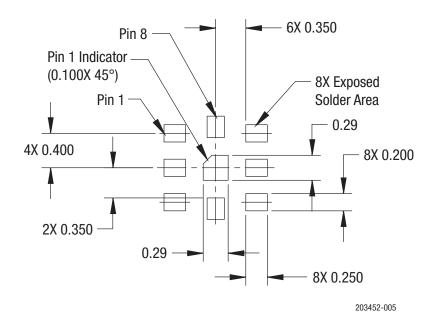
SKY13586-678LF PCB Layout Footprint (Top View)
